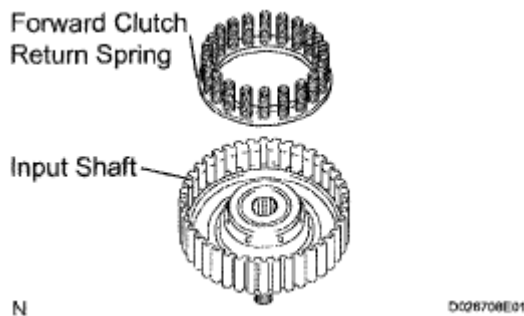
Identifying Forward Clutch Return Spring And Input Shaft
